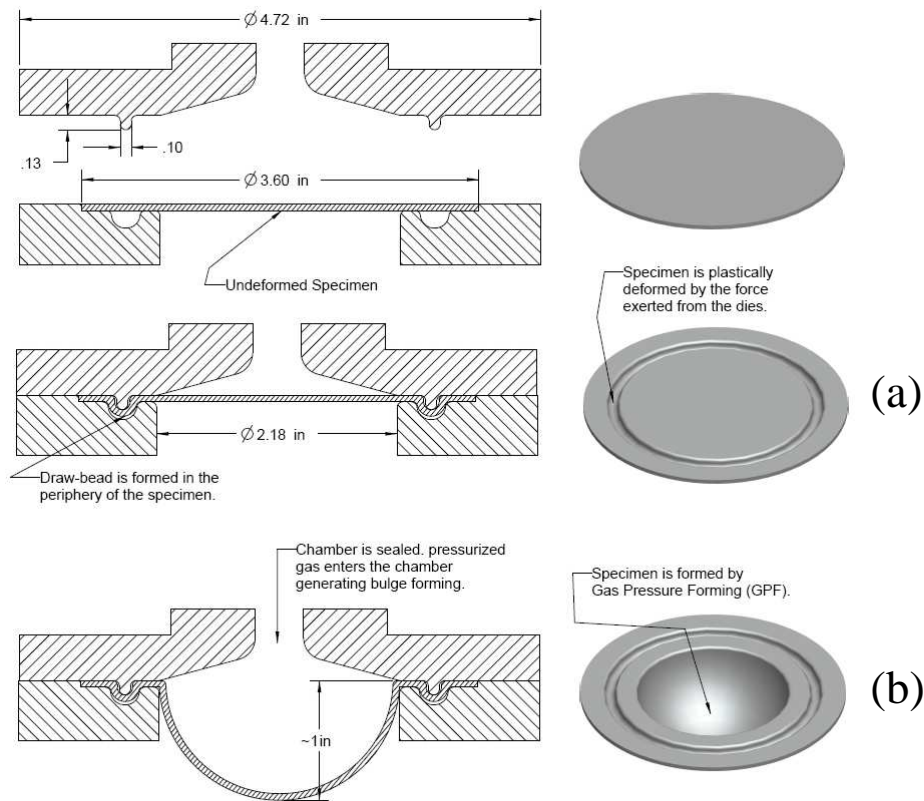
Two-step forming of sheet-metal blank: (a) forming of the draw-bead by the clamping of die-rings, (b) forming of the dome by gas-pressure blow-forming.
